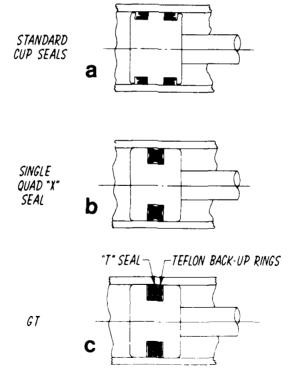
c. Hydraulic Cylinder Piston Seal Modification
